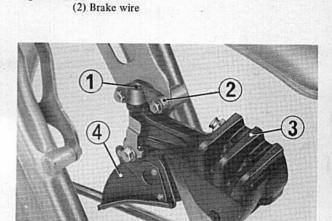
(1) Disc cover (2) Caliper body (3) Caliper joint (4) Caliper pin
